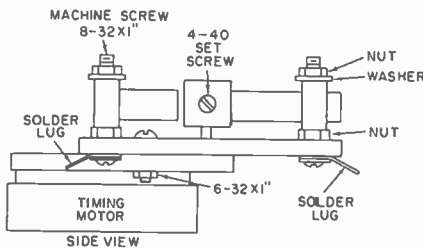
Stationary contacts (side view) should be positioned to provide gentle contact and timed to extinguish the light just before the ring reaches it.
